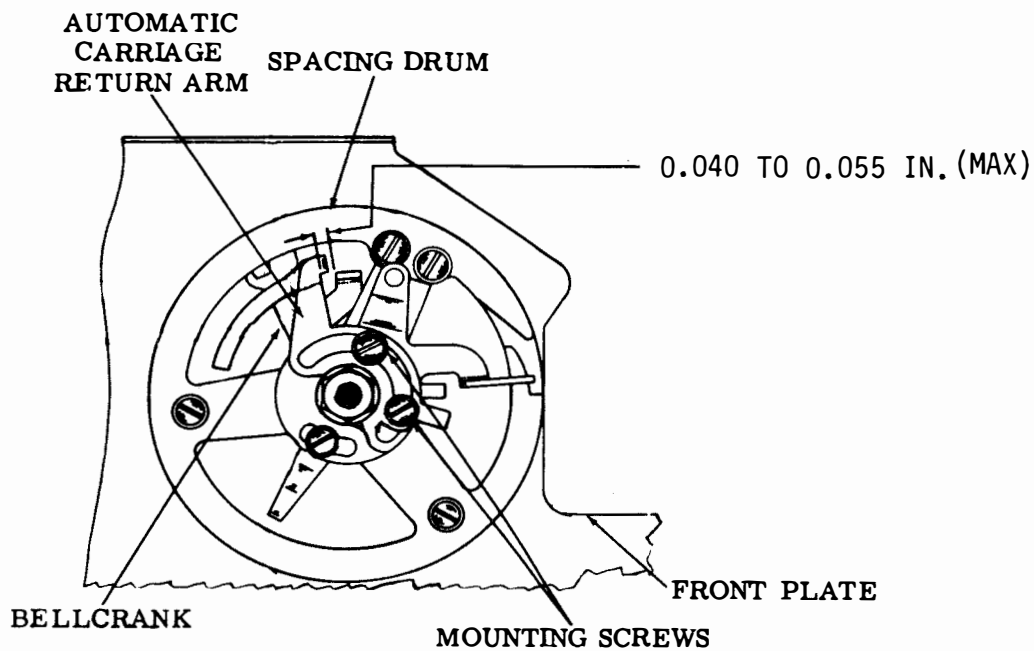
Automatic Carriage Return and Line-Feed Arm, Front View
